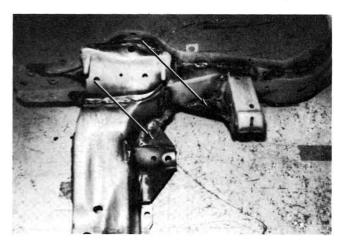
Weld gussets to crossmembers and lower control arm bracket.
